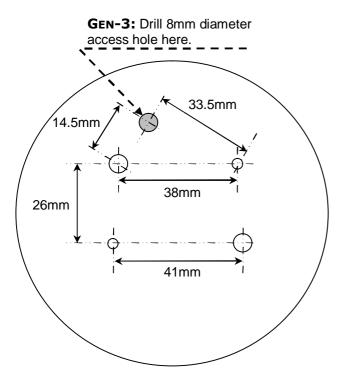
Location of calibration access hole in Gen-3 RVC tachometers. (rear view, not to scale)
